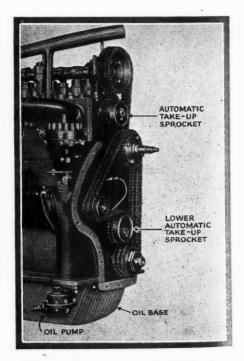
Arrangement of chain drive for overhead camshaft in new Stutz engine.
